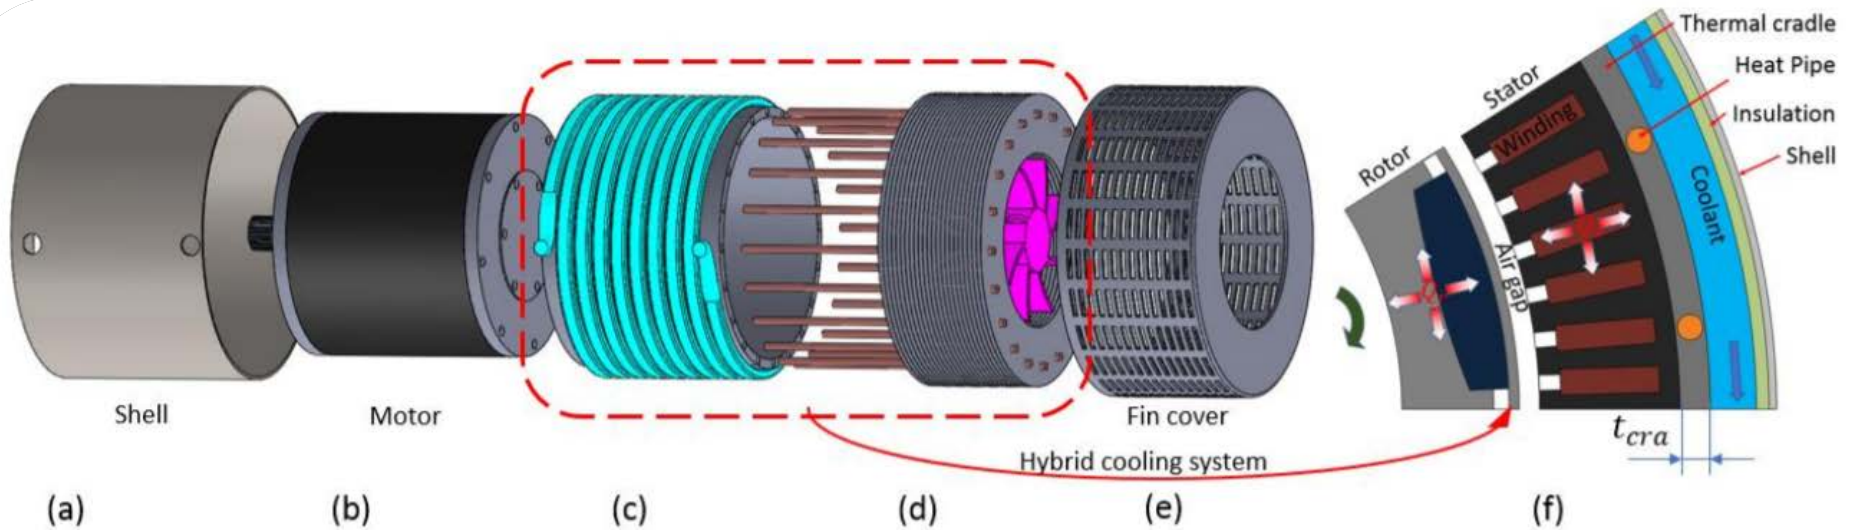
Electric motor cooling system configuration – (a) motor shell; (b) electric motor; (c) thermal cradle and coolant jacket; (d) heat pipes, fin structure heat exchanger, and centrifugal fan; (e) heat exchanger cover; and (f) cutaway view of motor cooling concept
